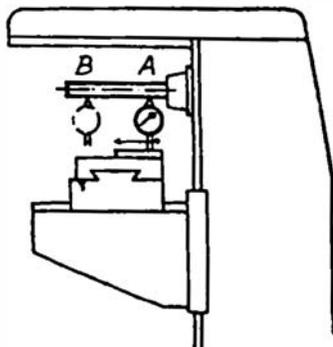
Parallelism between the Surface of the Table and the Spindle Axis
